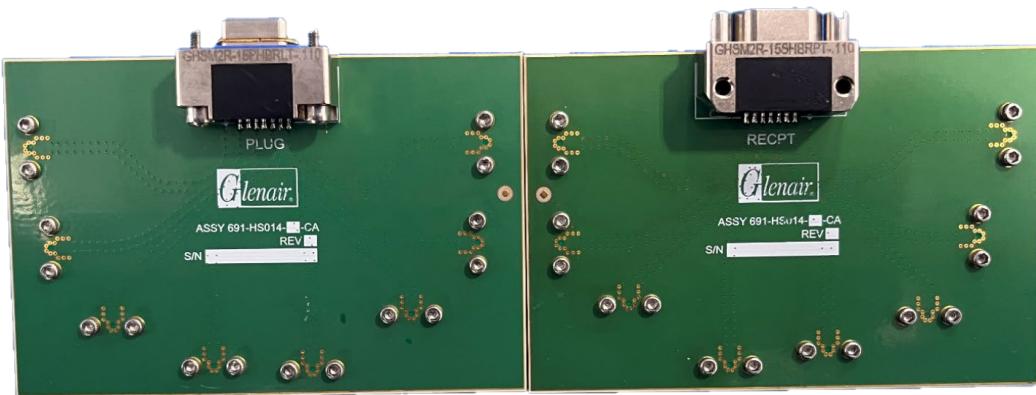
Right Angle PC Tail GHSM-HBR Pin and Socket Test PCB's
